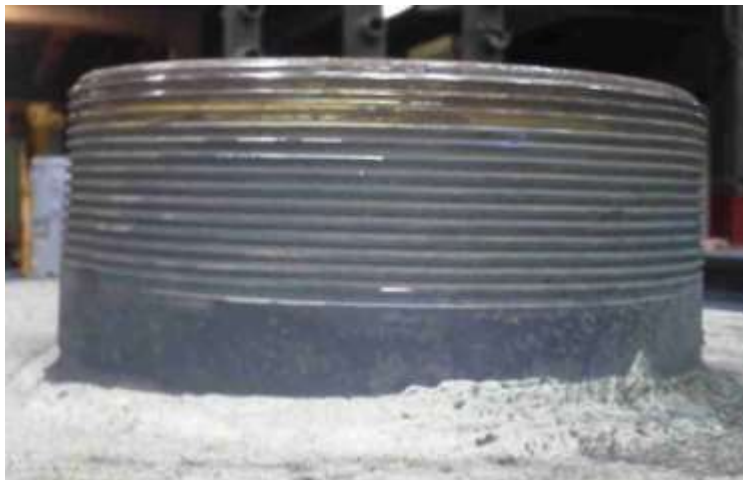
Brass Pipe Cap (not shown) on Stainless-Steel Pipe
